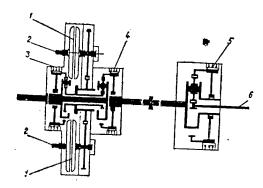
Diagram of reduction gear transmission of the frigate "Köln": 1- fluid clutch; 2- diesel shaft; 3- full-speed clutch; 4- cruising-speed clutch; 5- clutch for connecting the gas turbine; 6- gas-turbine shaft.
